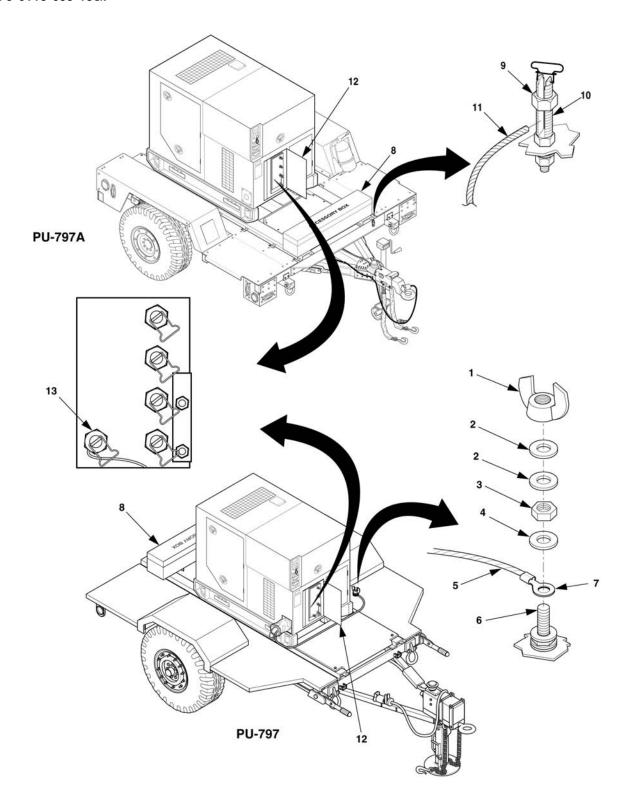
PU-797 and PU-797A Ground Wire Installation.
